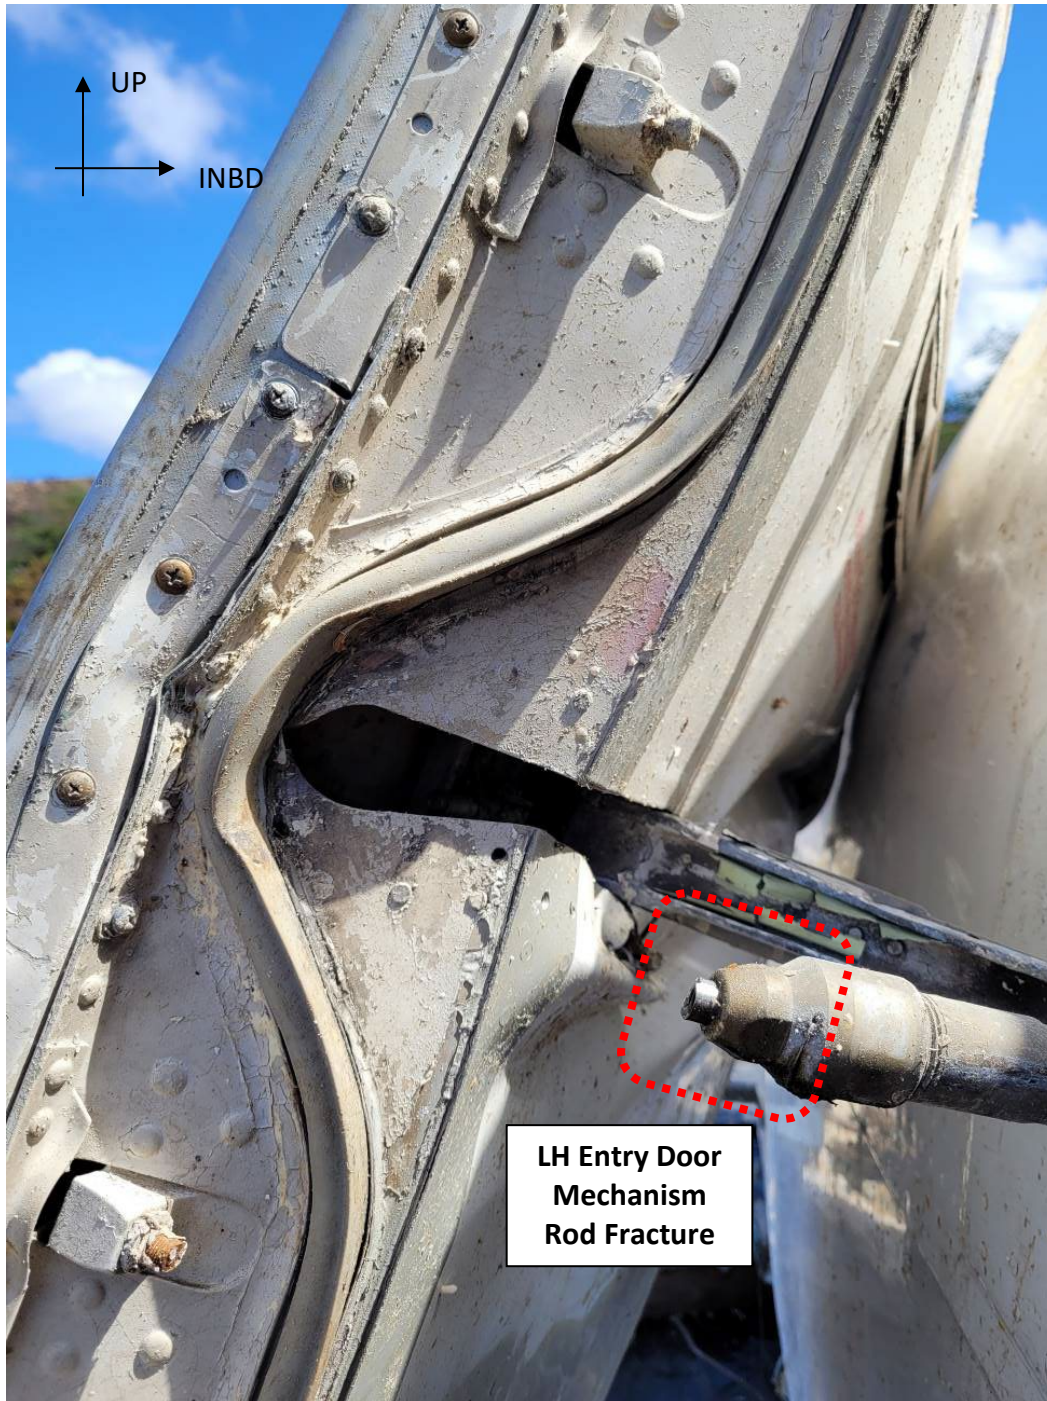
Left Forward Entry Door lower hinge mechanism rod damage (Boeing photo)
